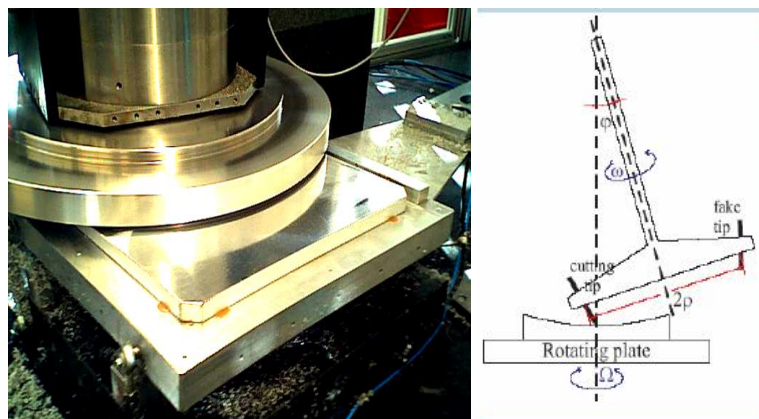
Diamond milling machine. A diamond tip mills the surface to give spherical shape, rotating on two axes. Mirror rotates around optical axis while machine axis rotates tilted [Credits Doro].
